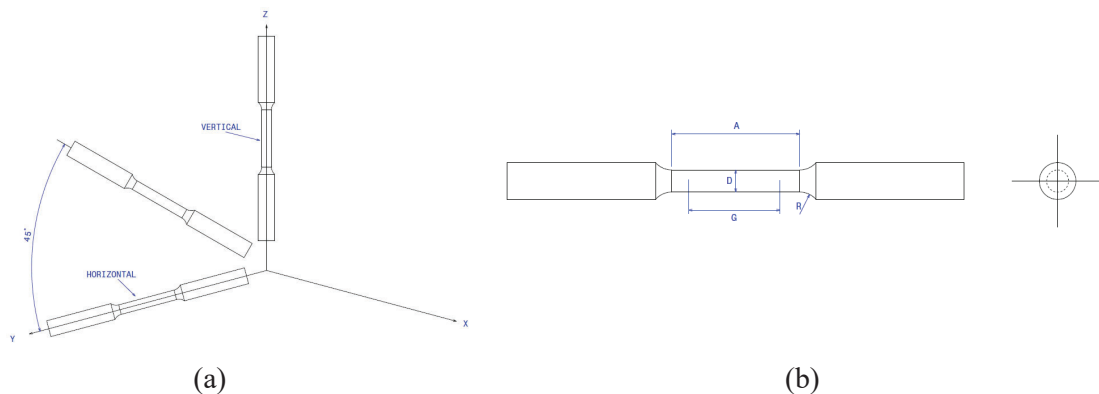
Specimens manufacturing conditions (a) built orientation of test specimens (b) geometry and dimension of test specimens according to standard ASTM E8
